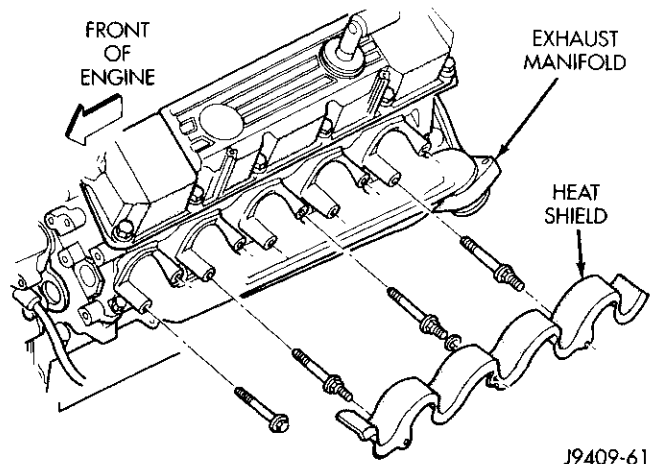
Spark Plug Wire Heat Shields (Left Side Shown)
